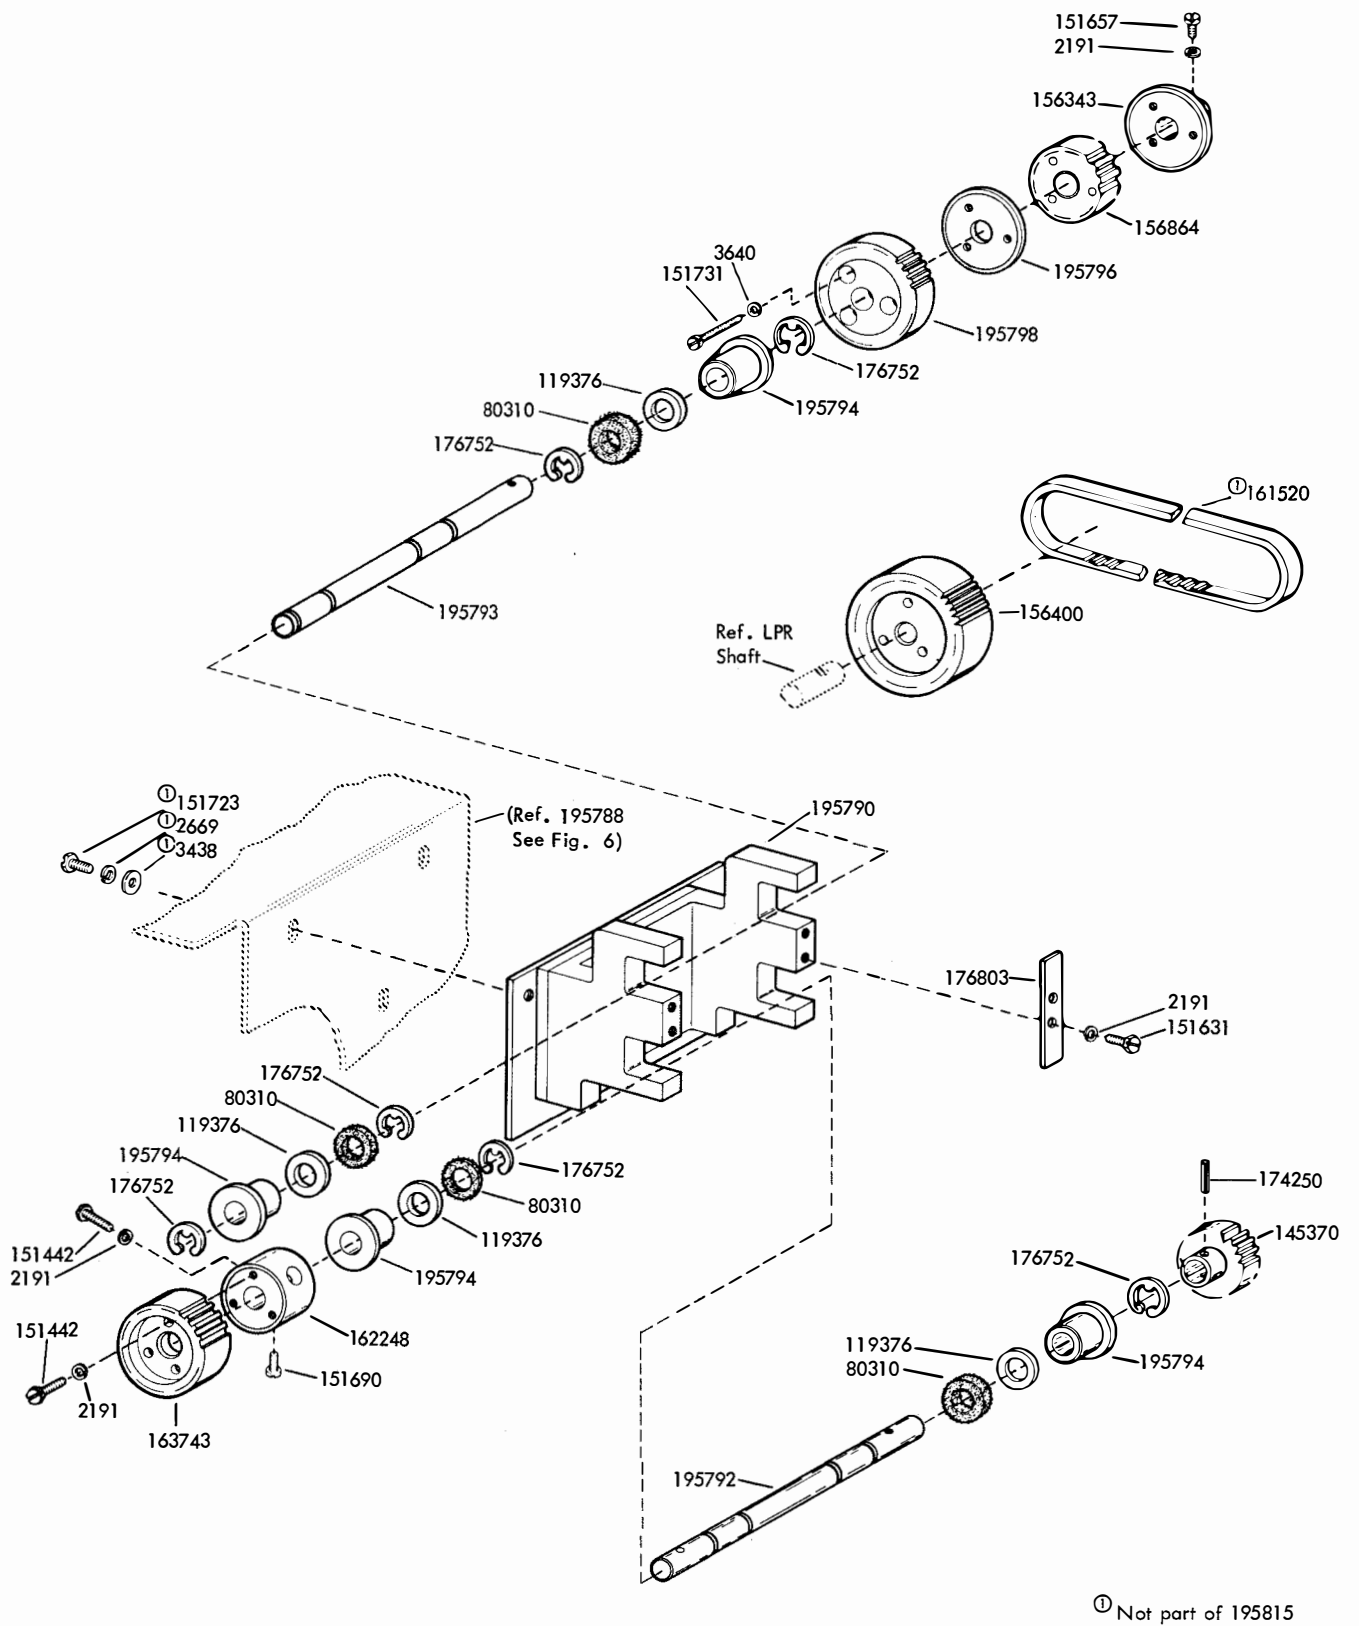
195815 GEAR BRACKET ASSEMBLY
